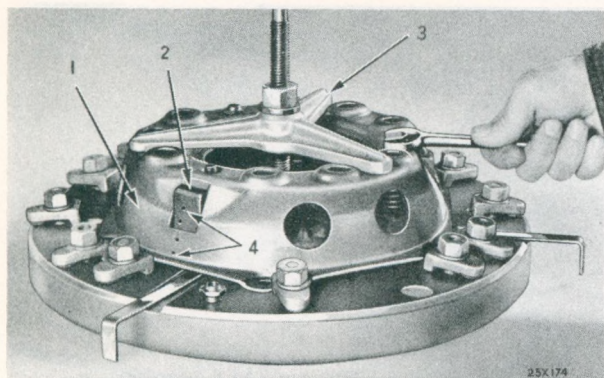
Clutch Cover and Pressure Plate Assembled in Fixture
